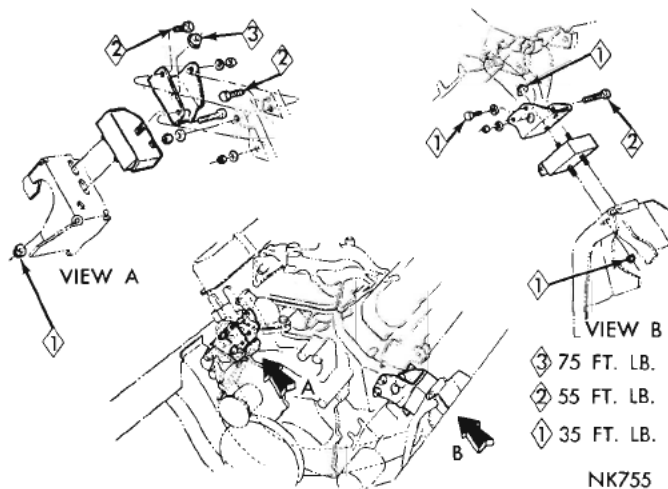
Front Engine Mounts 361-383-426 AP-2
